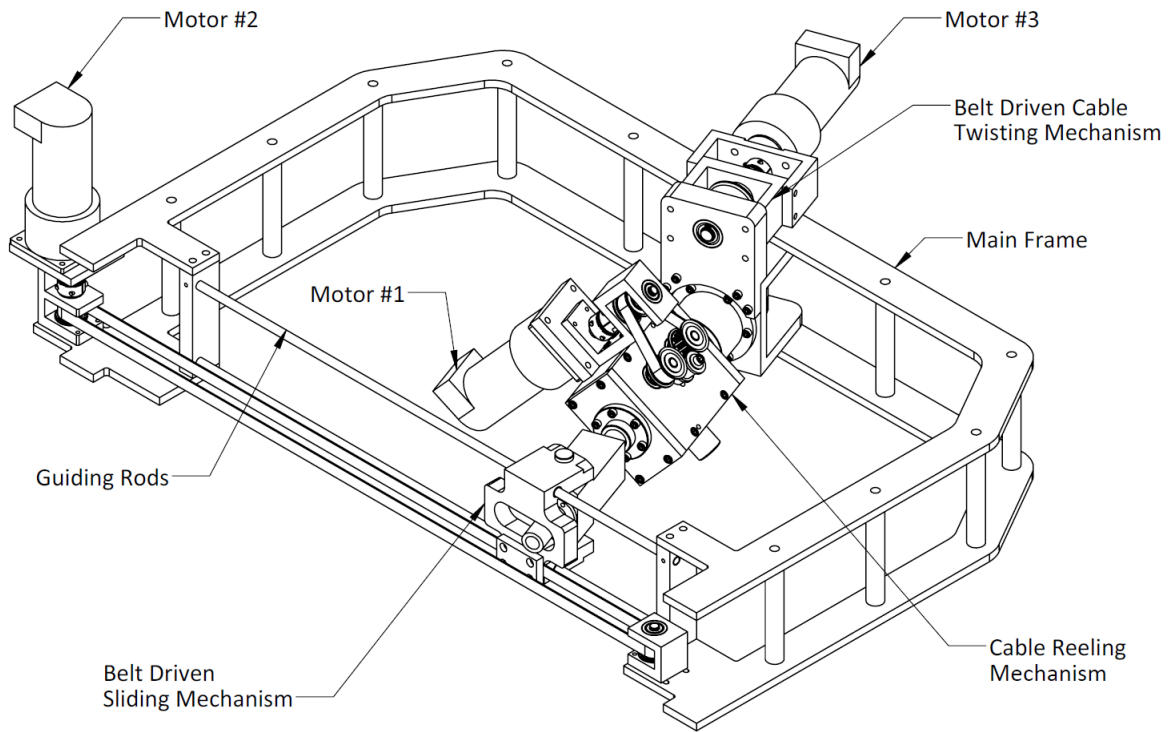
Prototype II Assembly of Cable Manipulation Unit Overview
